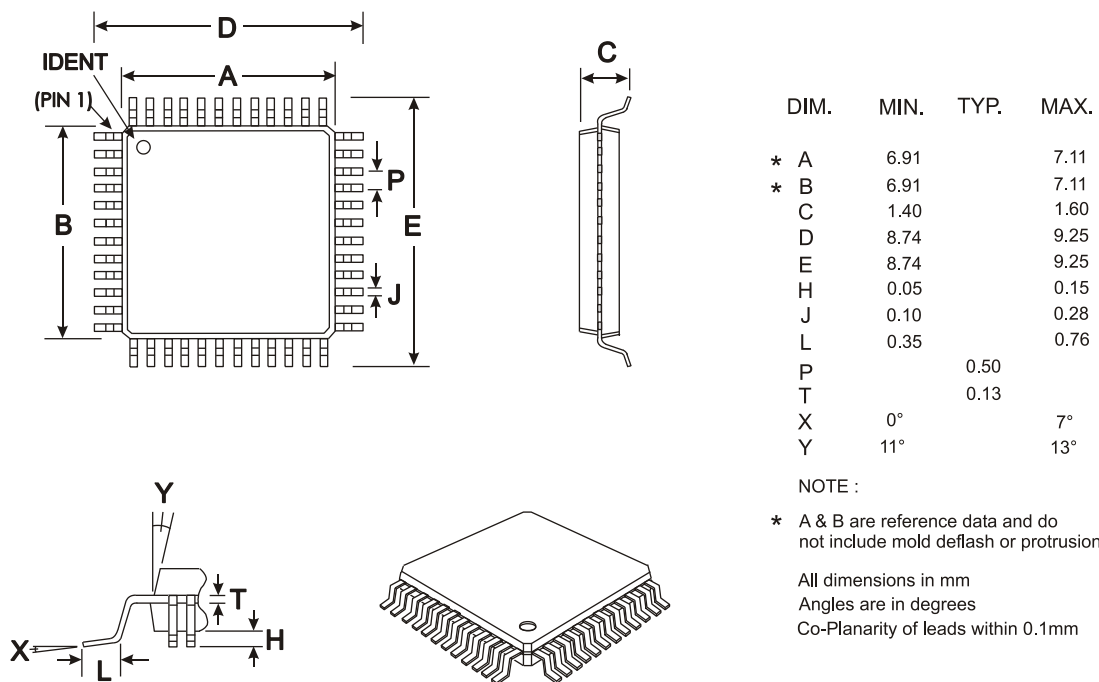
Mechanical Outline for 48-pin LQFP (leaded) Package (L4)
